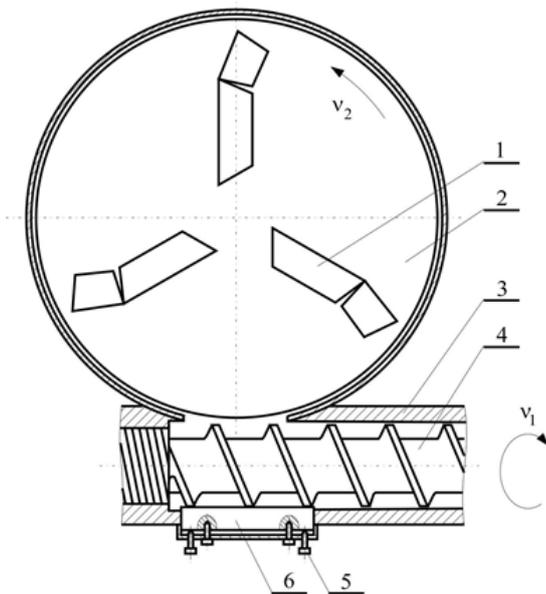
Schematic of the longitudinal section of the feed opening and feed sections of an extruder plasticizing system: 1 - sharp working edges, 2 - rotating tool, 3 - barrel, 4 - screw, 5 - adjusting screw bolts, 6 - slat (rib), v_1 - rotational speed of the screw, v_2 - rotational speed of the rotating tool [3]
